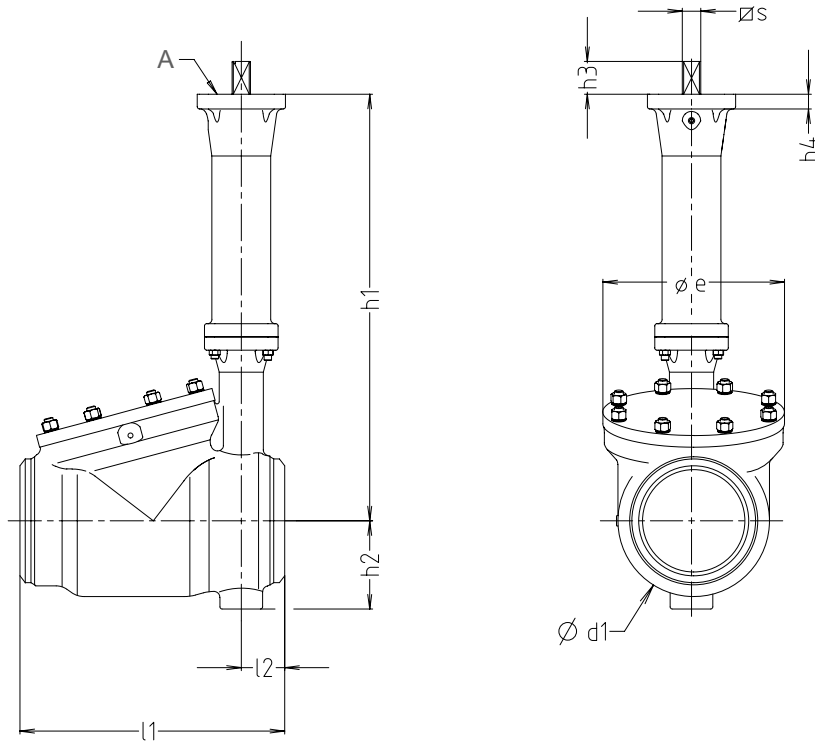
Sectional drawings of TRIODIS 150 CRYO - BW - DN 100-150 (4-6 inch)
